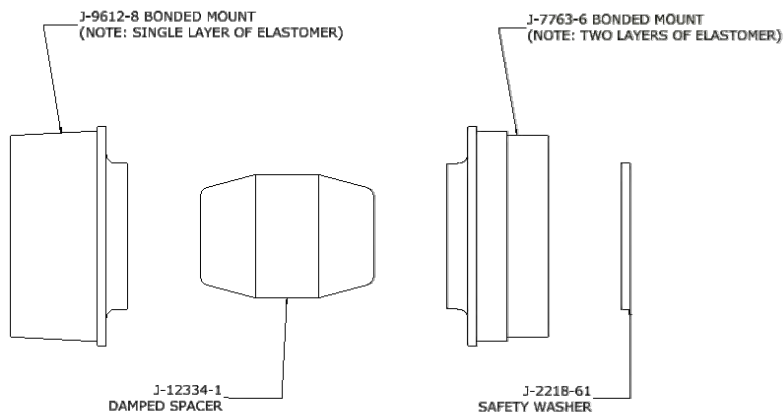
ENGINE MOUNTING ASSEMBLY KITS (continued)
